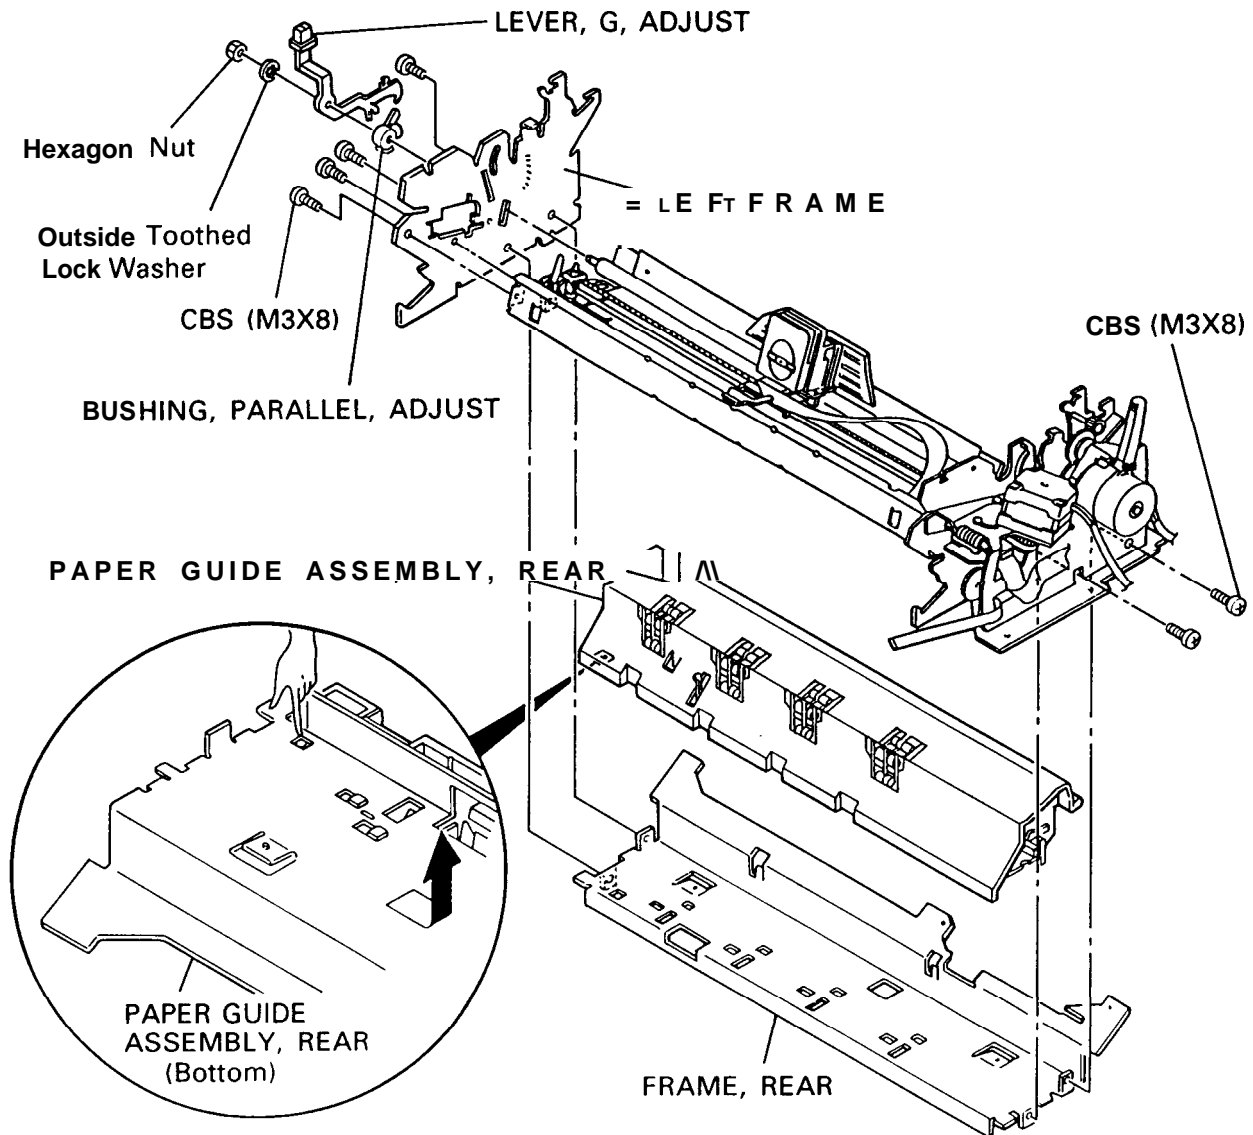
Removing the FRAME ASSEMBLY, REAR
